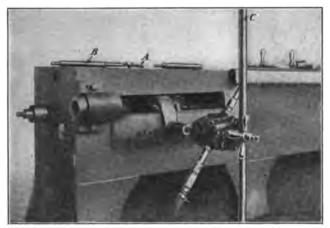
Method of Drilling and Reaming the Holes in the Lathe Bed for the Tumbler Locking Pins
